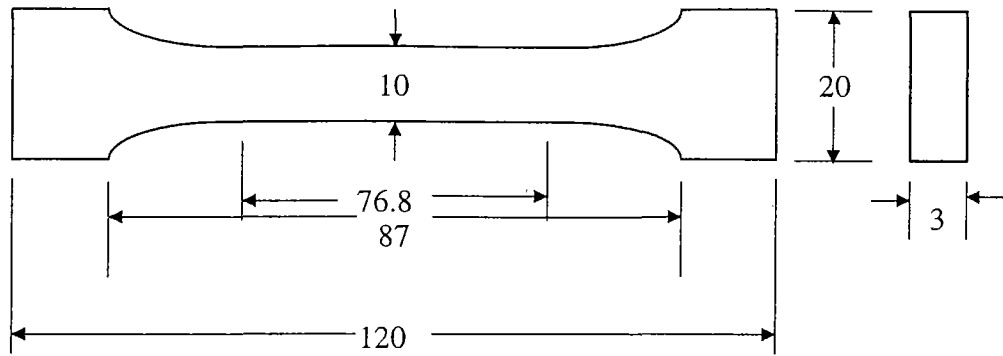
Tensile test specimen (all dimensions are in mm).
